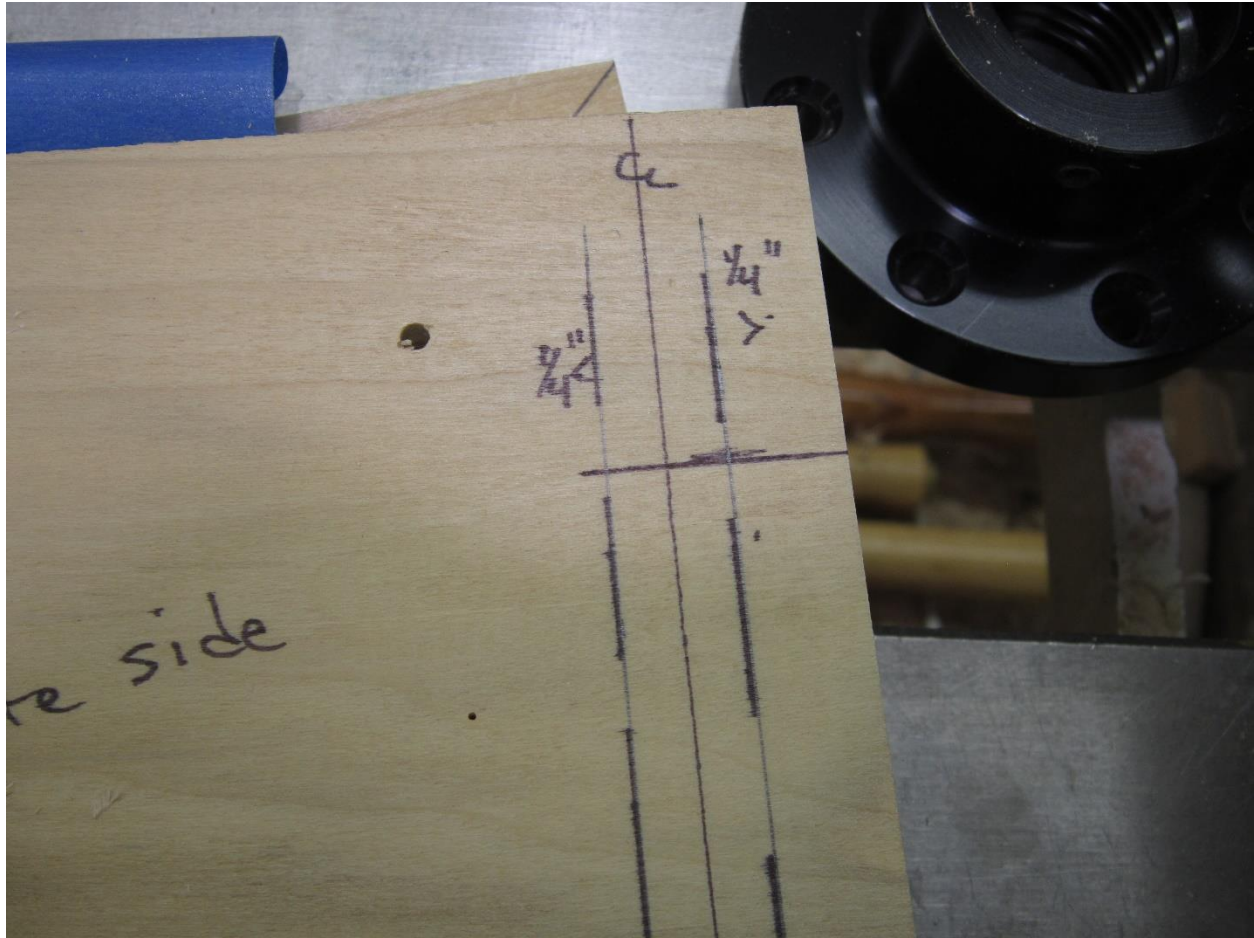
Alignment marks on the edge of the faceplate board and back of the workpiece mounting board.
